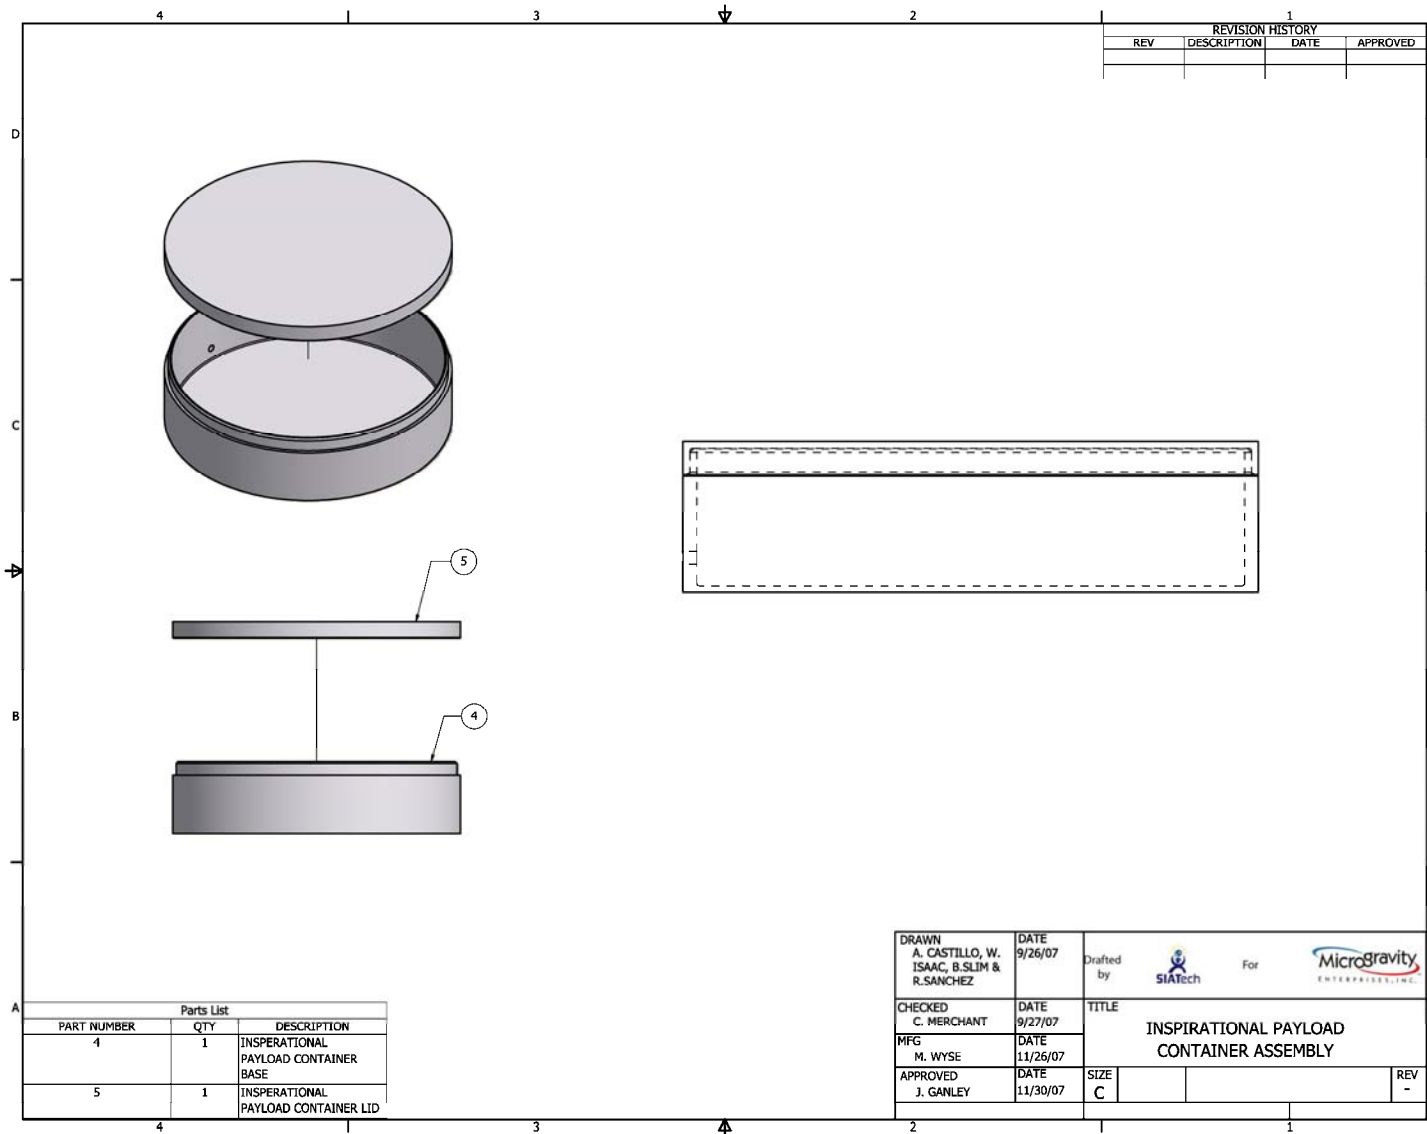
Recommended Inspirational Payload Container Assembly Drawing
